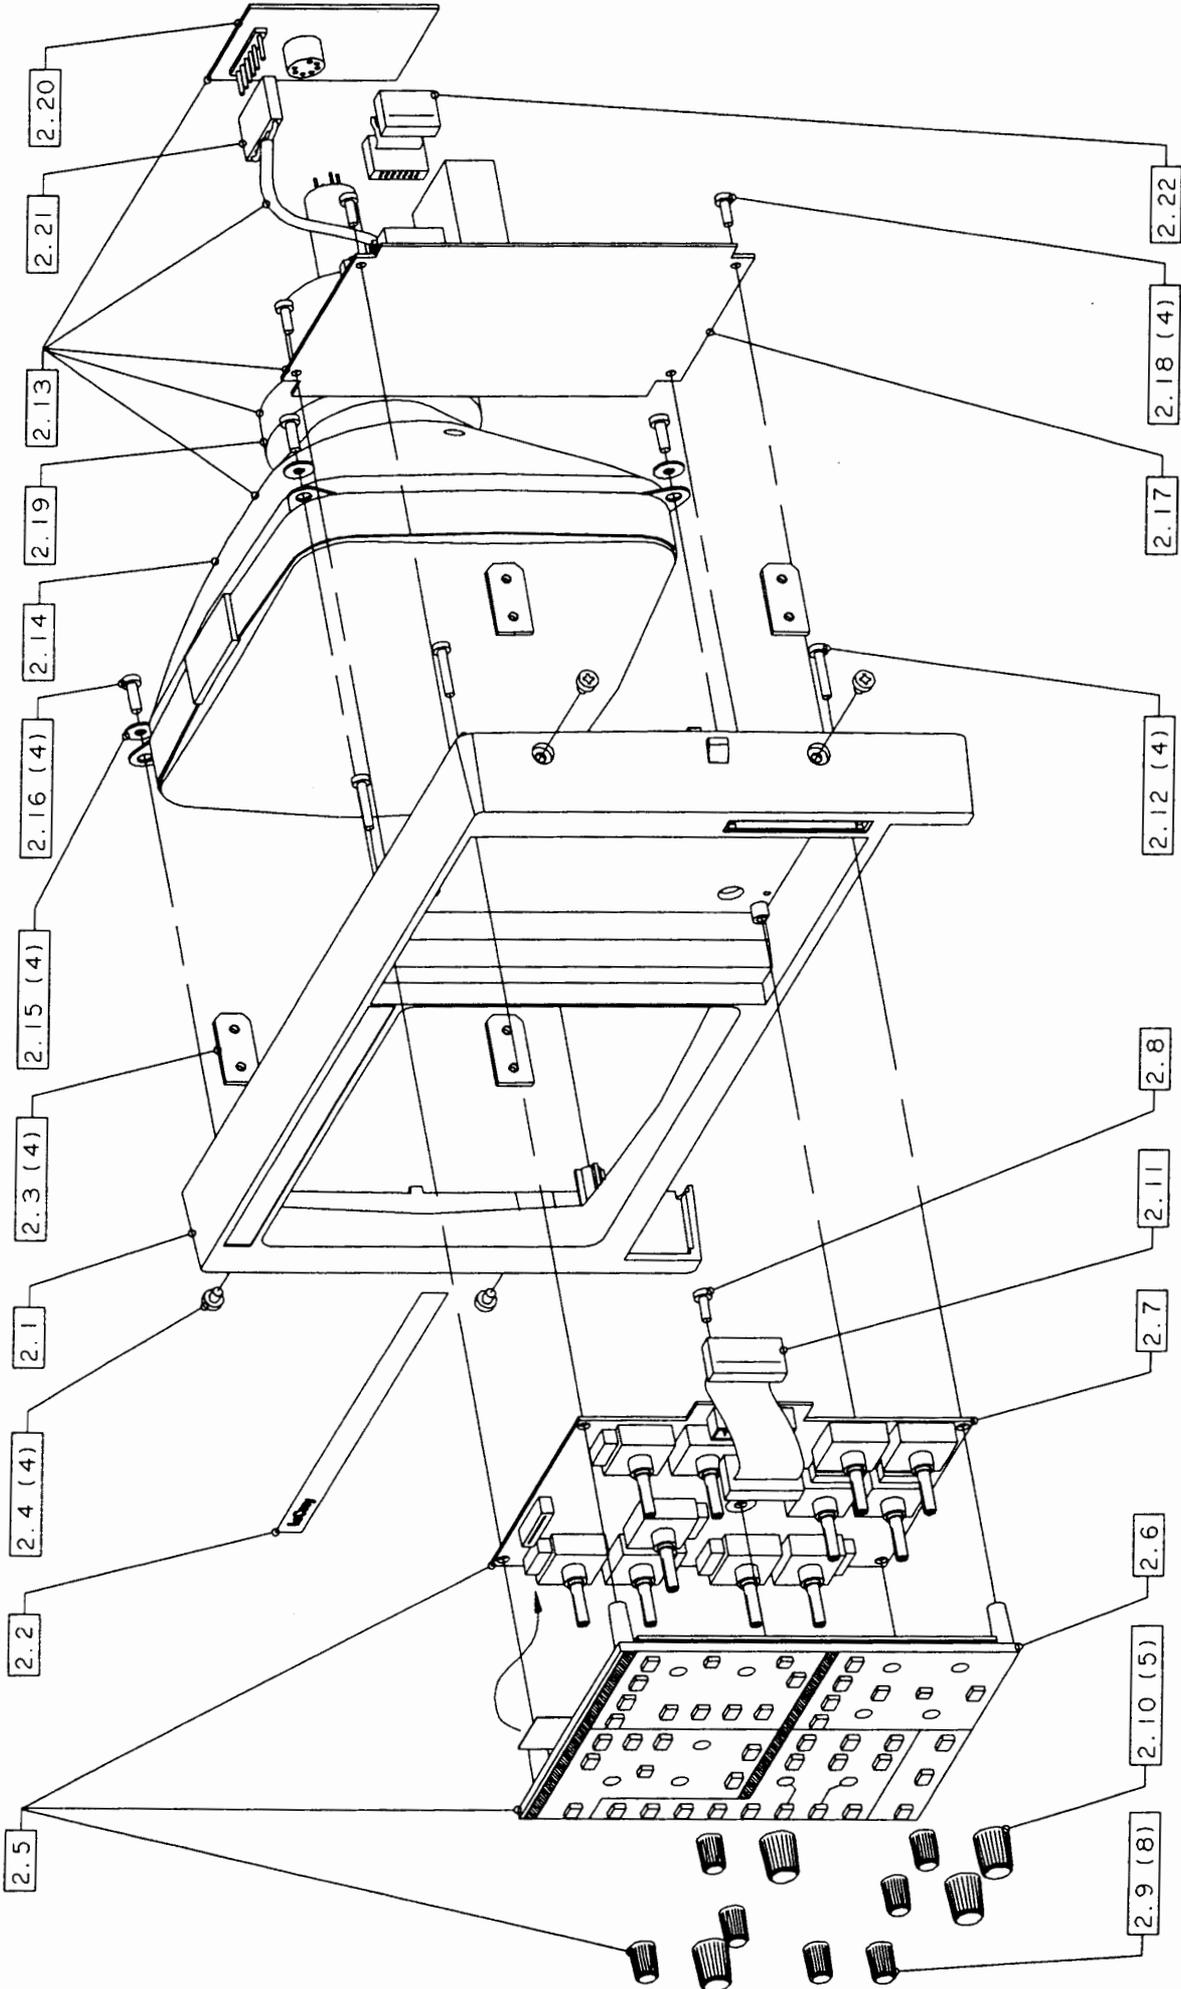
9314A/M/L Front Frame Exploded View
